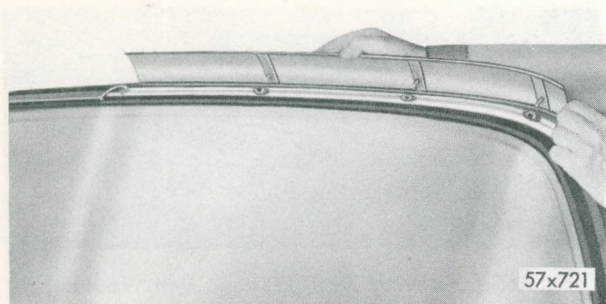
Removing or Installing Upper Windshield Moulding (Imperial Models)
